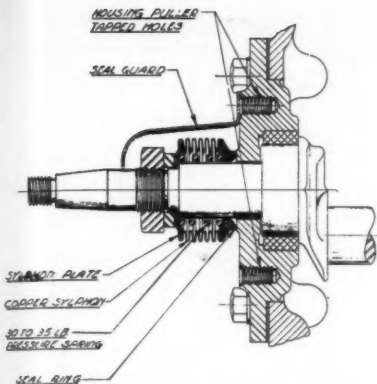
COMMERCIAL SEAL ASSEMBLY
